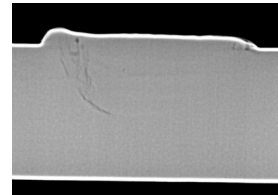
Radiograph cross section of plate containing a weld repair made with A206 weld wire.
